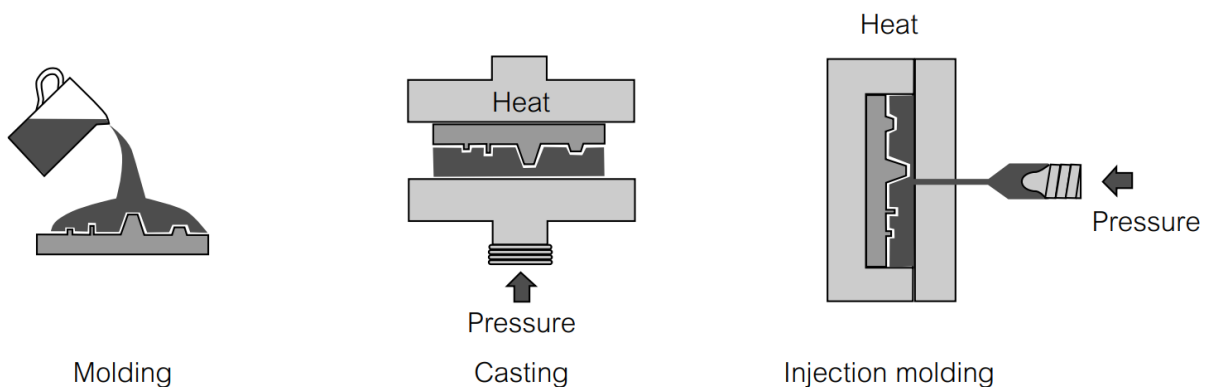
Different techniques for mold replication: molding, casting and injection molding. From [213].
